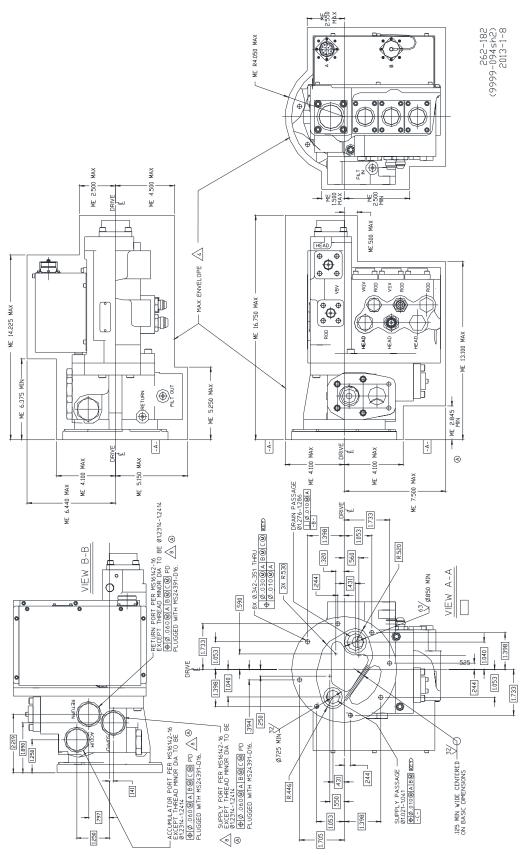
Outline Drawing of 9902-701 HCU (2 channel)
